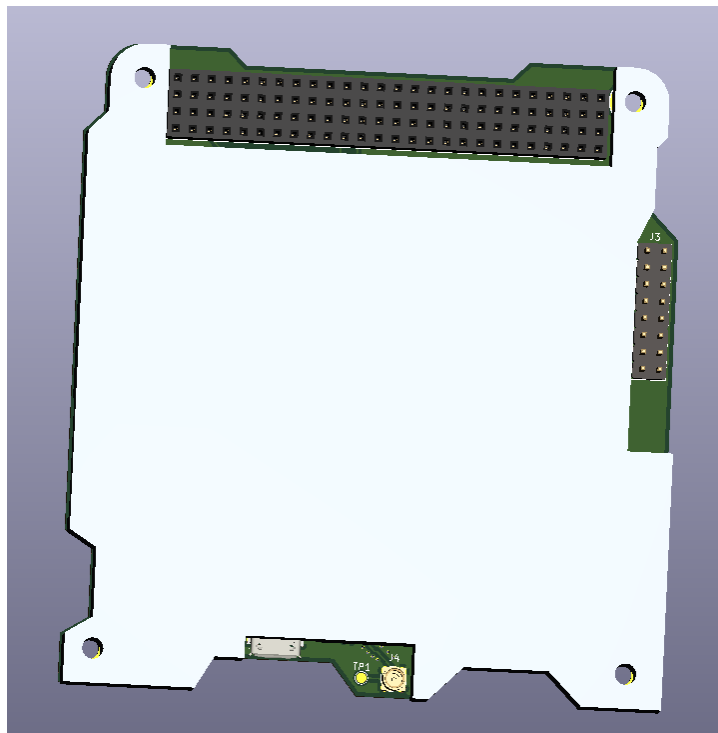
OrbFIX PCB with 1.5 mm aluminium shield
